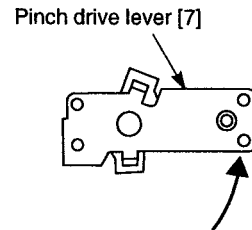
(Bottom side of Mechanical Deck)
